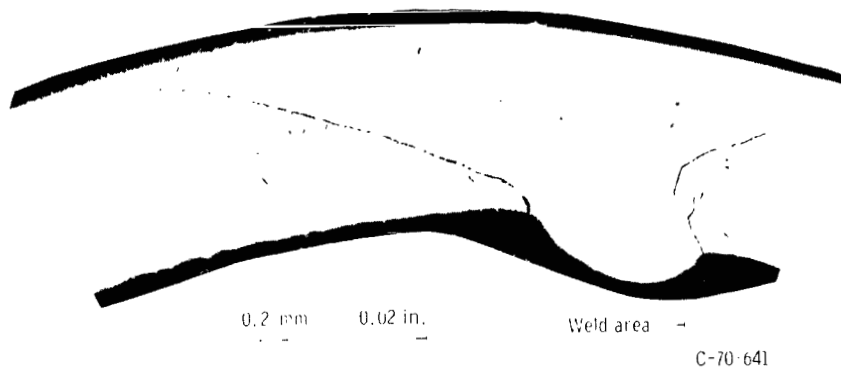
Section of typical ball (from bearing 215-1-H) on which no surface spalls were evident. Cracks shown originated at weld area. Section taken parallel to and through running track.
